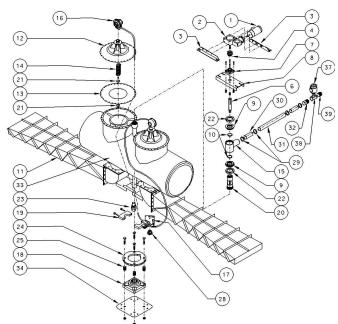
MCF756 and Larger Dual Cleaning Arm
